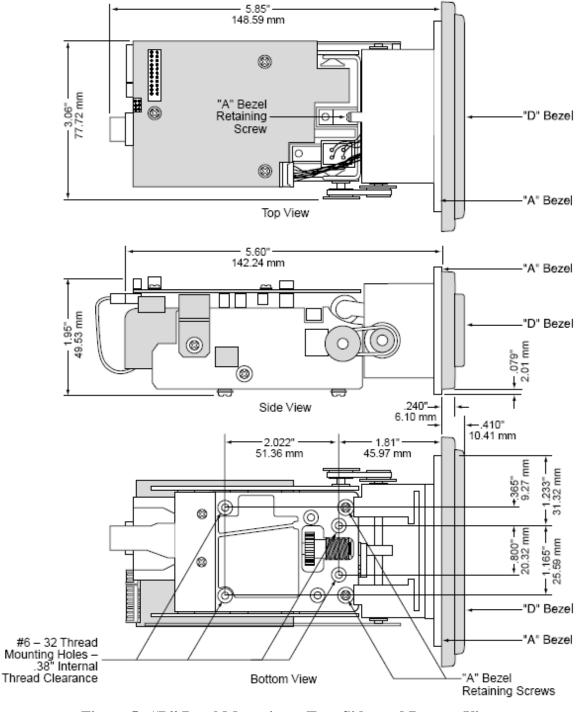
"D" Bezel Mounting – Top, Side, and Bottom Views
